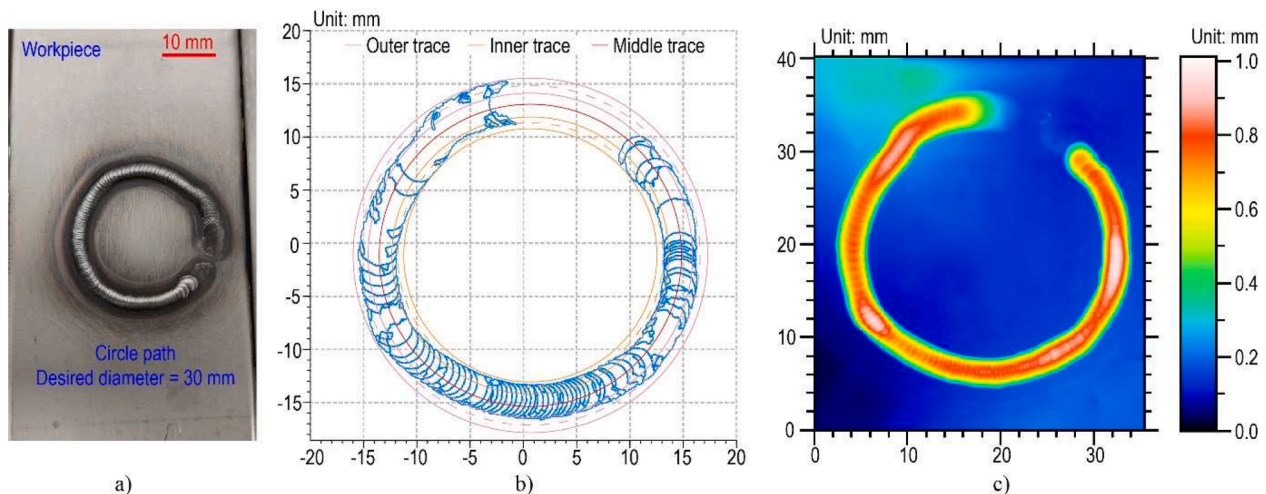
Welding accuracy and quality analysis for the collaborative macro-mini manipulator system to follow a circle shape path. a) The final welding results for following a circle path; b) Contour of welding path shows the position accuracy of the collaborative welding system; c) Topography layer of the welding path shows the deposition height over the welding trace.
